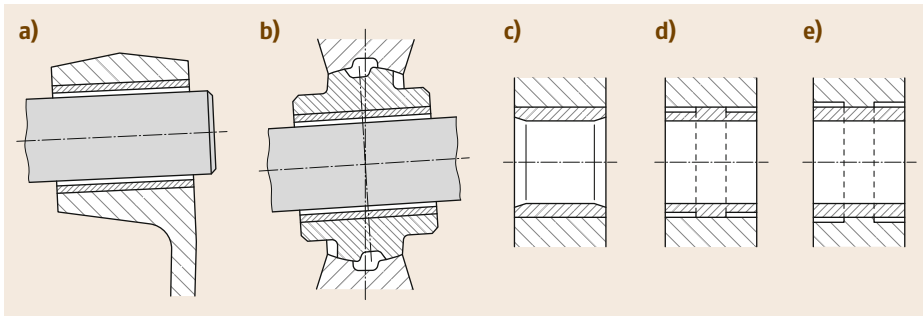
e Design measures to reduce edge wear: (a) elastic resilience, (b) tilting movability of the bearing body, (c) tapered widening of the ends of the bearing bores, (d,e) elastic deformation of the bearing bush with reduced support width in the bearing body
